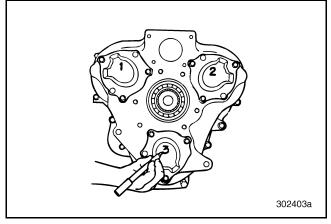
Mark Rear Countershaft Bearing Covers for Placement
